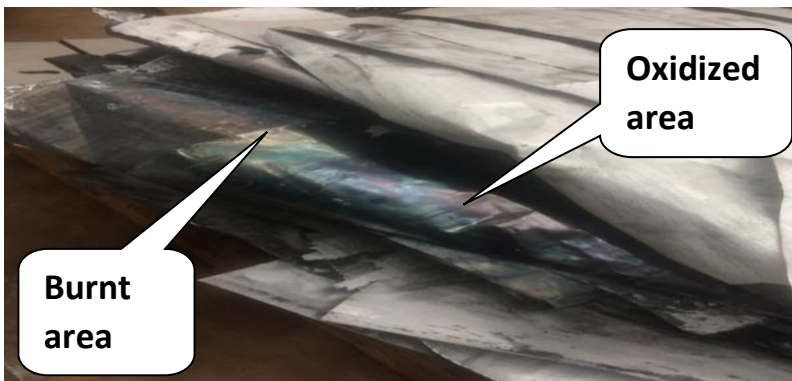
Rejected sheet oxidized and burnt (on site pictures)
